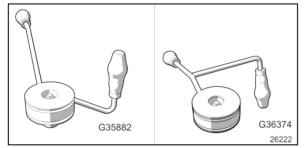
BASE WIPER SEAL ROLLER TOOLS
